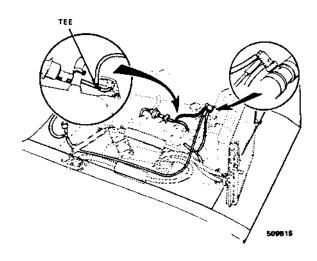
B-12 Thermo-vacuum Sensing Switch to Manifold Vacuum
